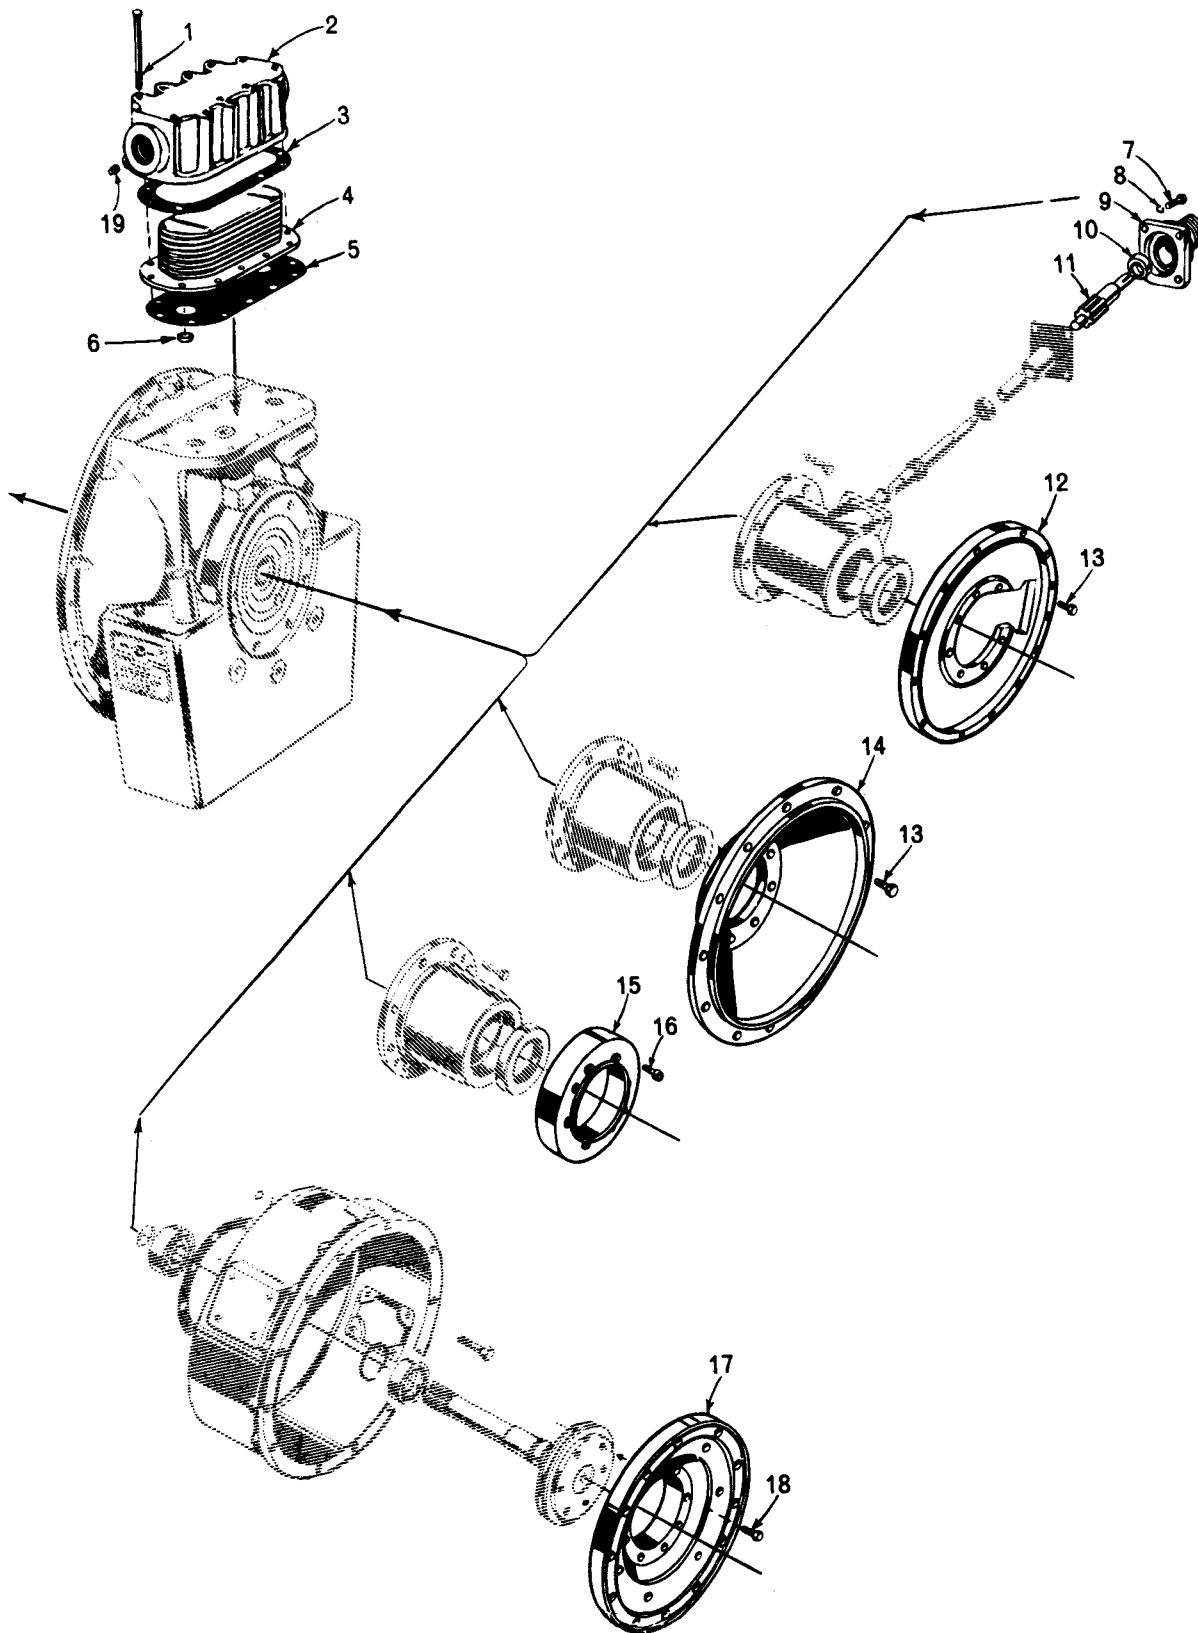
TC 200-300 SERIES OIL COOLER OPTIONS, CABLE DRIVE ADAPTER OPTION, REAR DISCONNECT CLUTCH ADAPTER OPTION, AND MOUNTING PLATE OPTIONS
